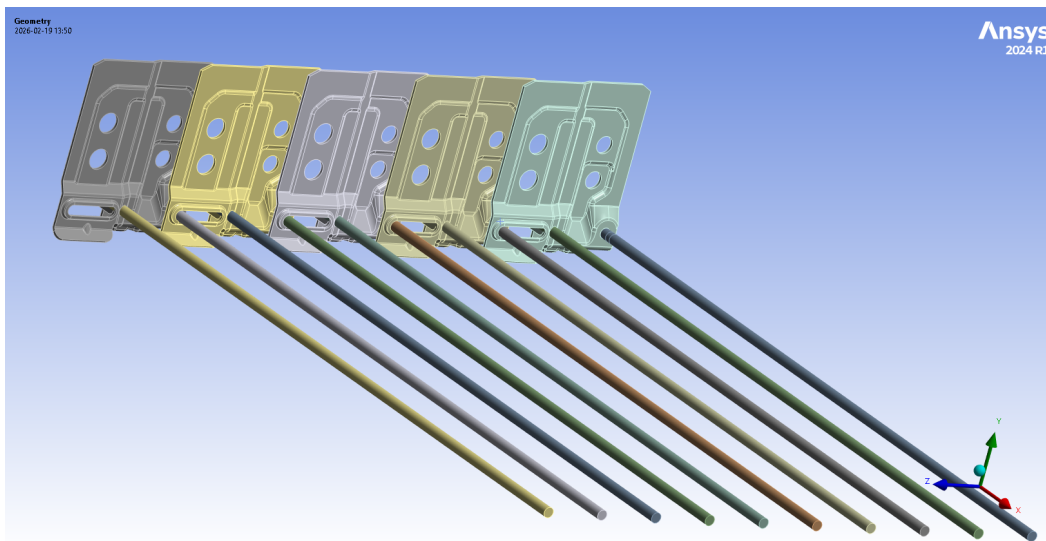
An overview of the geometry of the enhanced conveyor belt model including the side links, rods and welds used for the finite element analysis.
